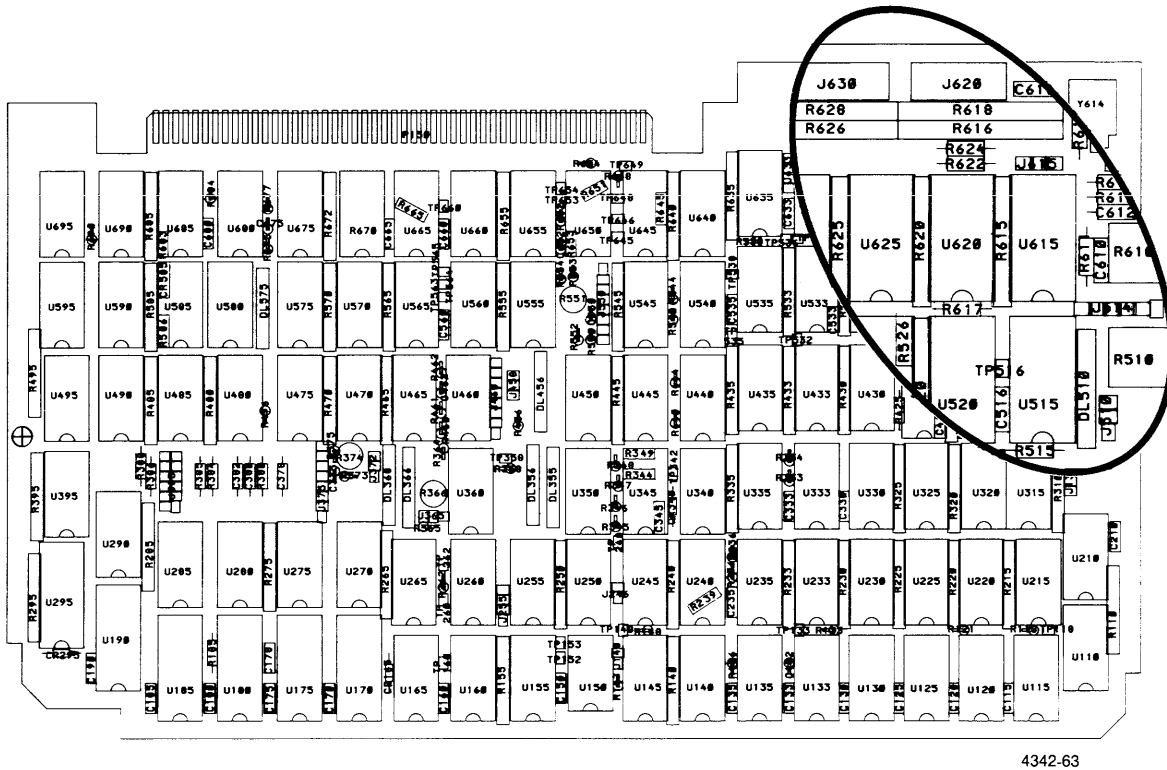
Expanded view of the Trigger Board shows components used in the TPG Adjust.
